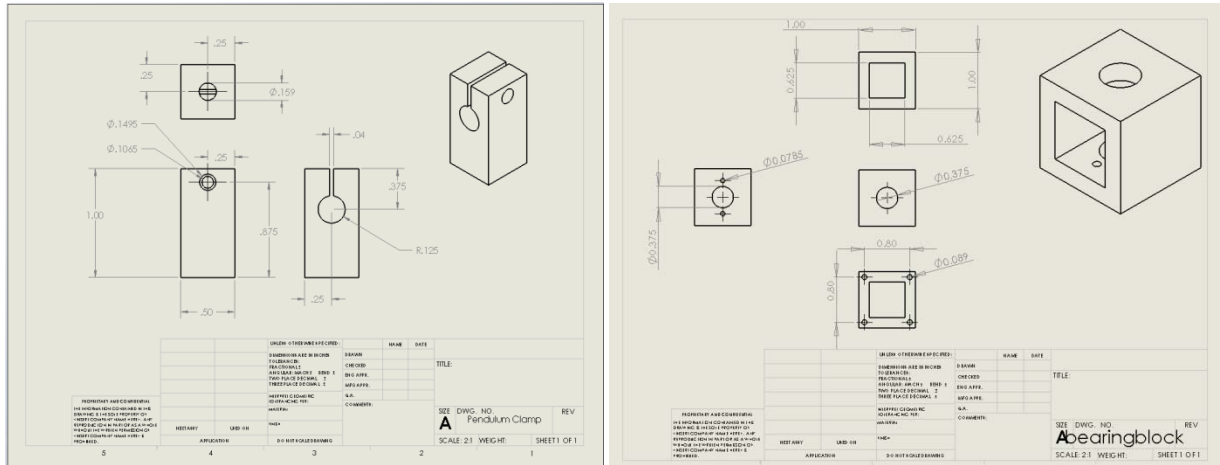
Dimensioned Drawing of Pendulum Attachment Clamp/Bearing Block
